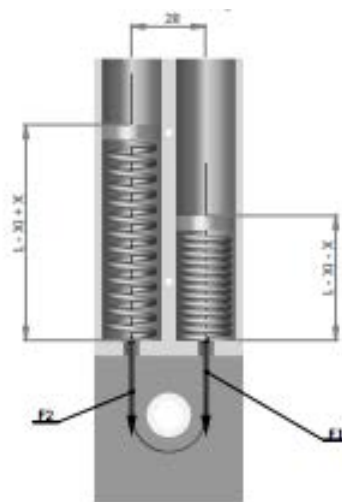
An illustration of a rotary Series Elastic Actuator. The rotating joint is at the bottom. As it rotates, it compresses one spring and the other spring relaxes. At equilibrium, both springs are at half-compression. This way the system will never attempt to make them go beyond 0 compression or full compression.
